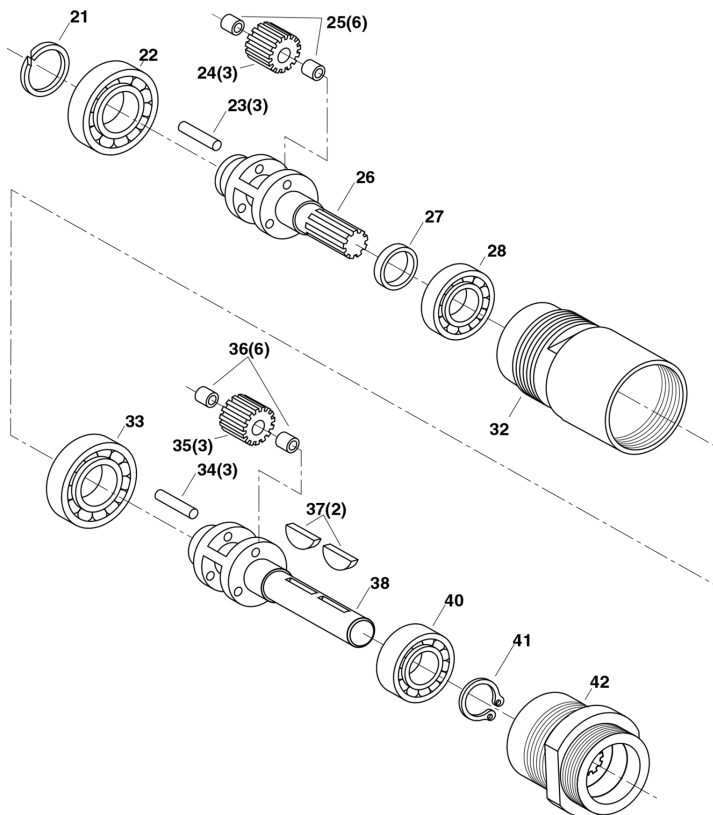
HV AIR MOTOR ASSEMBLY AND PARTS LIST (P/N 100105)
